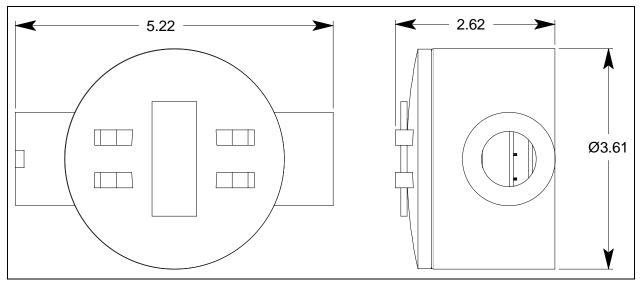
49-4000RK Aluminum Junction Box Outline and Mounting Dimensions
